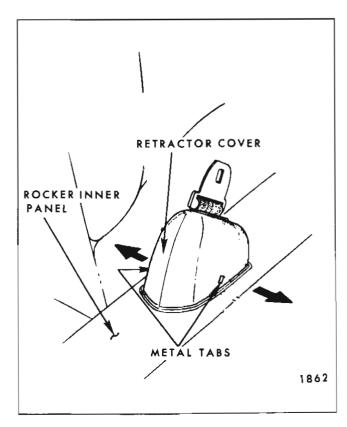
H41—Removal of Seat Belt Retractor Cover -All except 15000-16000 Series
